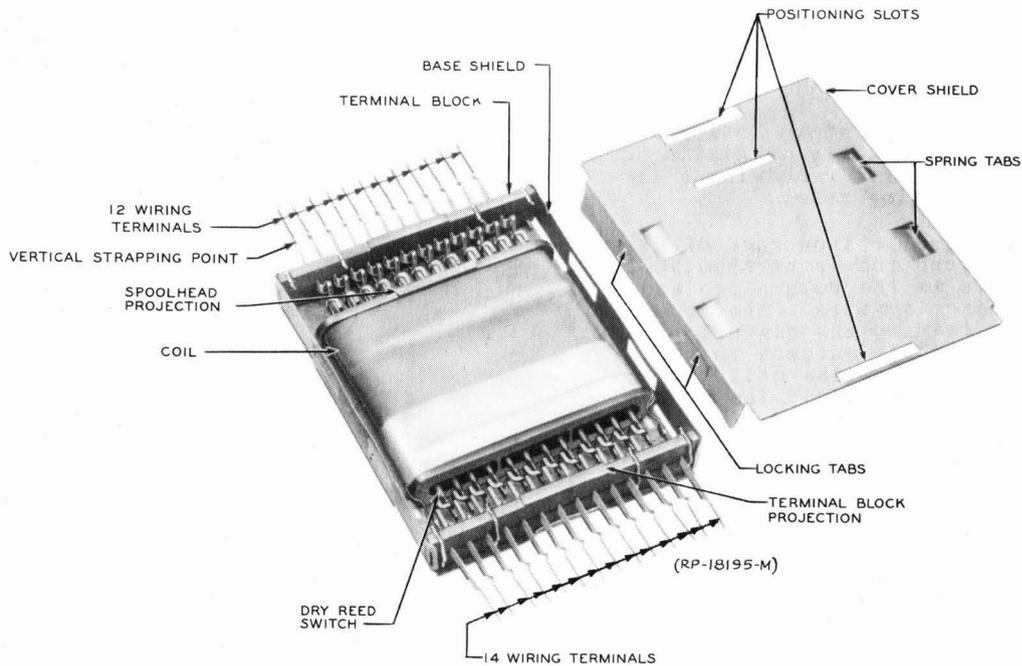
290 TYPE RELAY WITH COVER AND COVER SHIELD REMOVED
